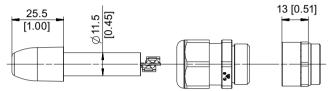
Dimension drawing SITRANS AW050 Bluetooth adapter, dimensions in mm (inch)
